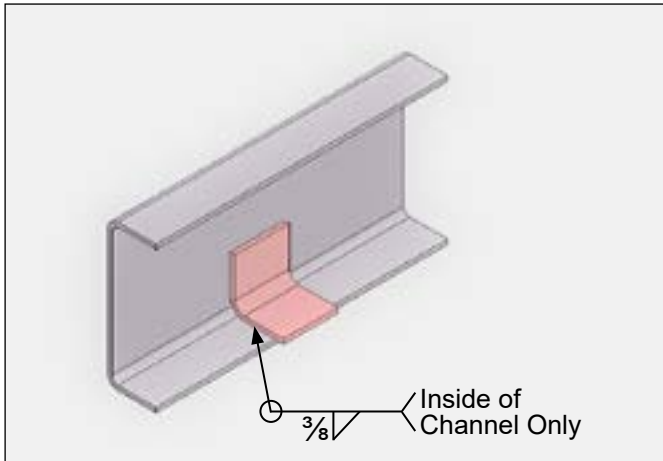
Welding Rear Pole Rack Base Plate
